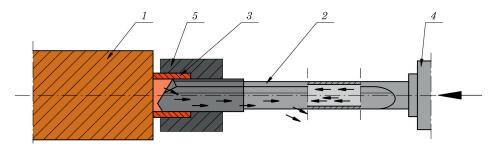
Guiding a barrel drill with a pilot sleeve: I – workpiece, 2 – drill, 3 – drill guide (pilot sleeve), 4 – tool holder, 5 – steady rest
